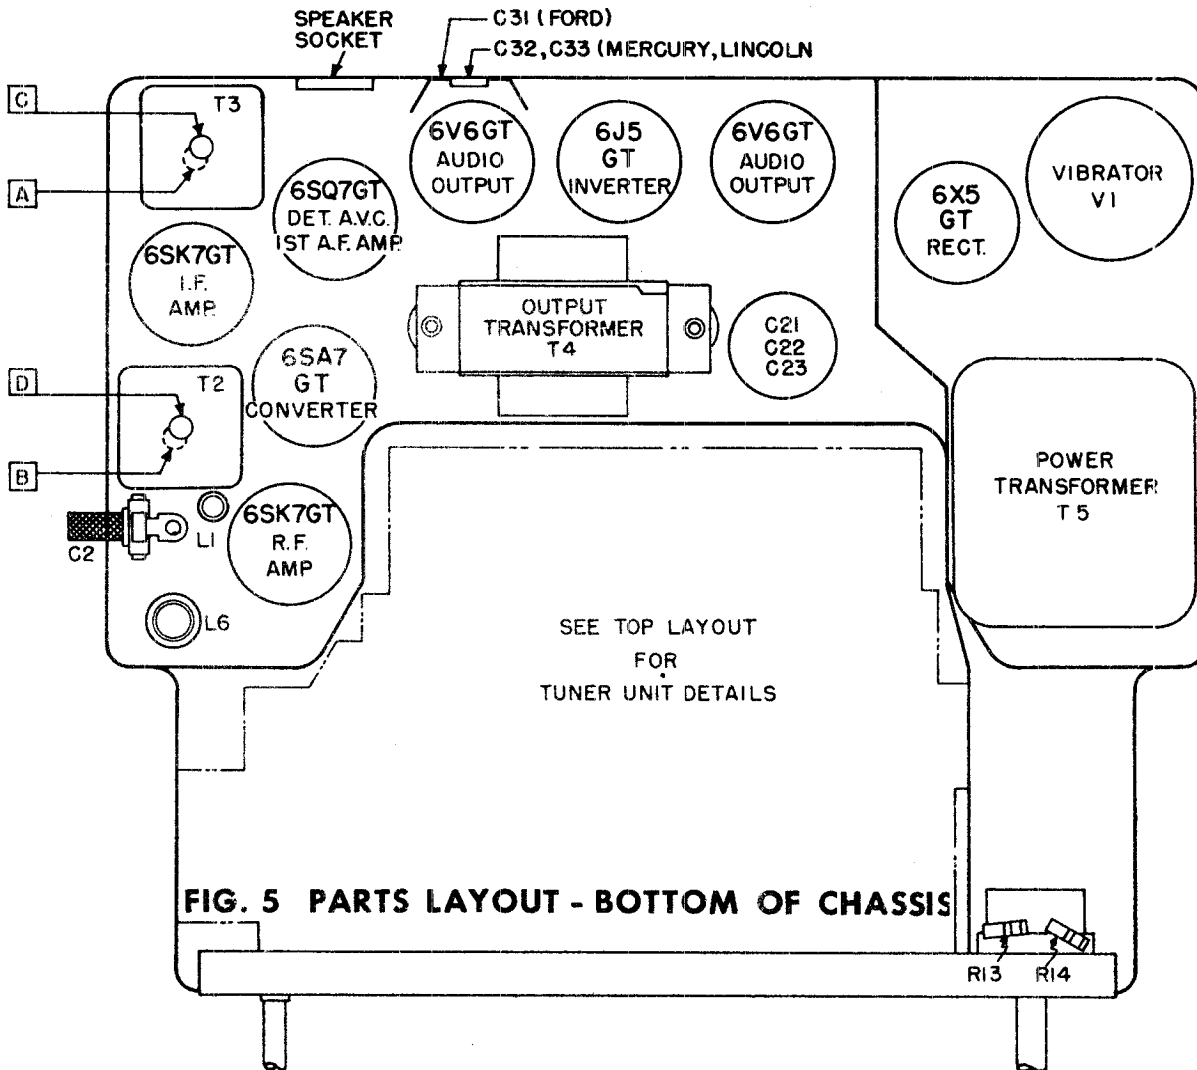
PARTS LAYOUT - BOTTOM OF CHASSIS
